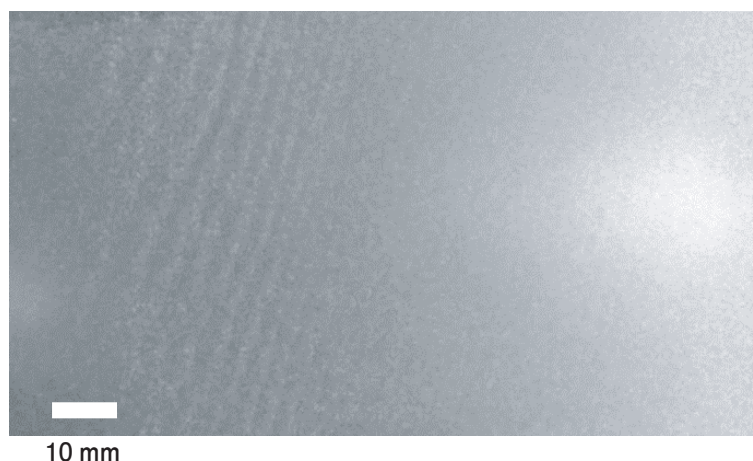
A sample photograph of channel-type macro-segregations formed in an ingot manufactured by DC casting.
